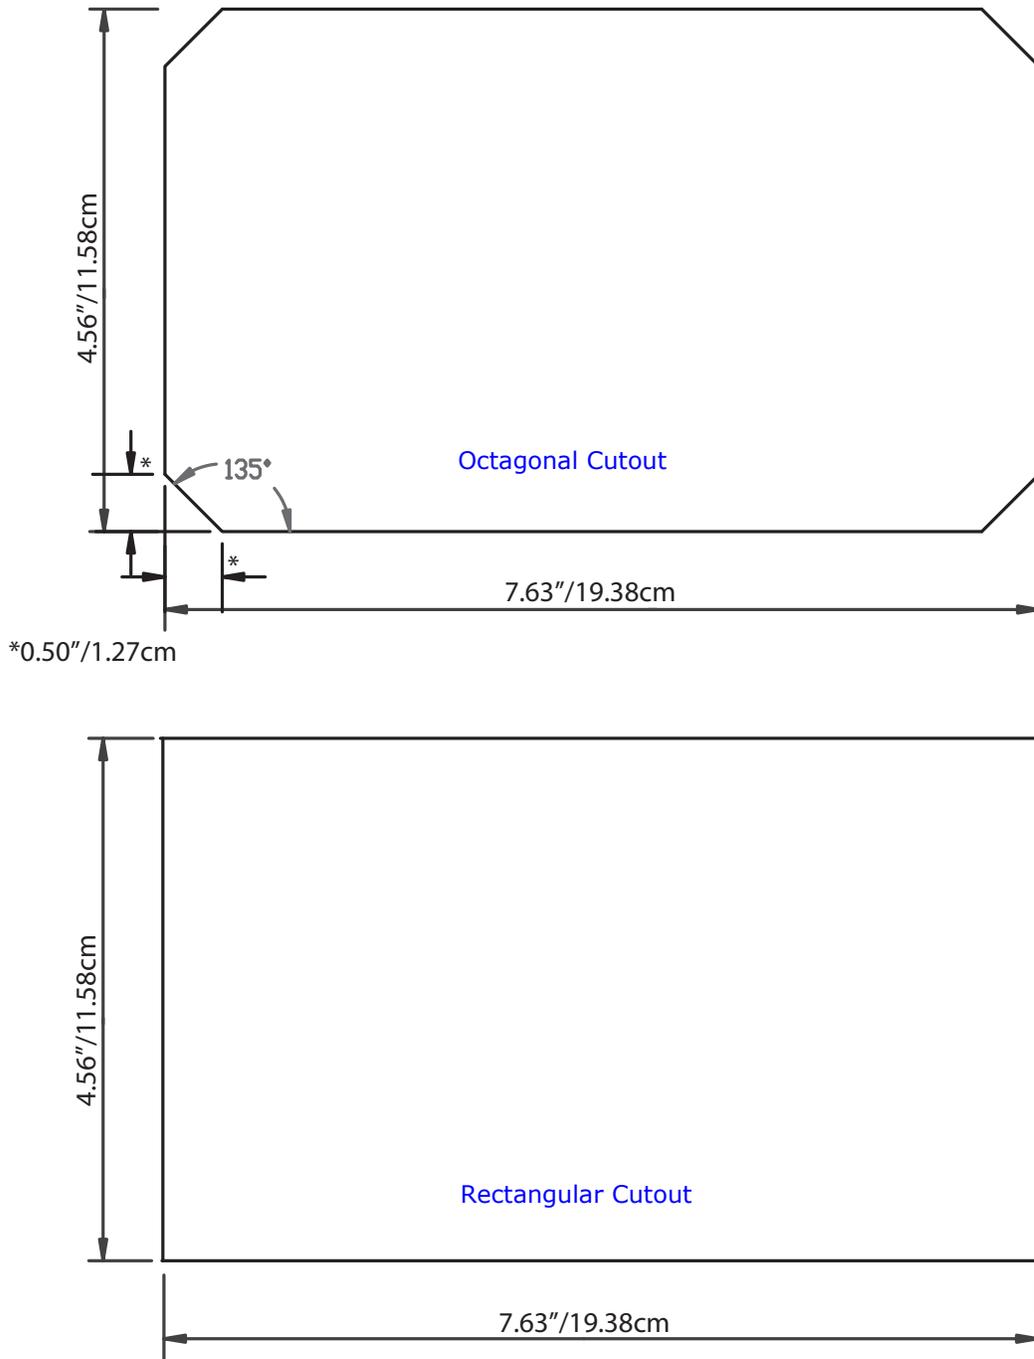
Optional Panel Cutout Dimensions - Horizontal
